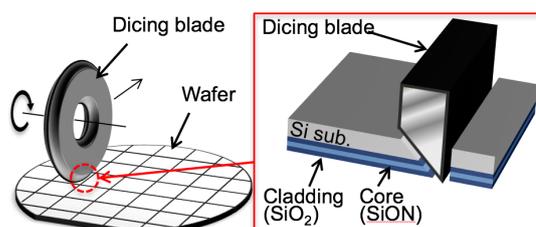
Schematic image of mirror fabrication with dicing technique.
